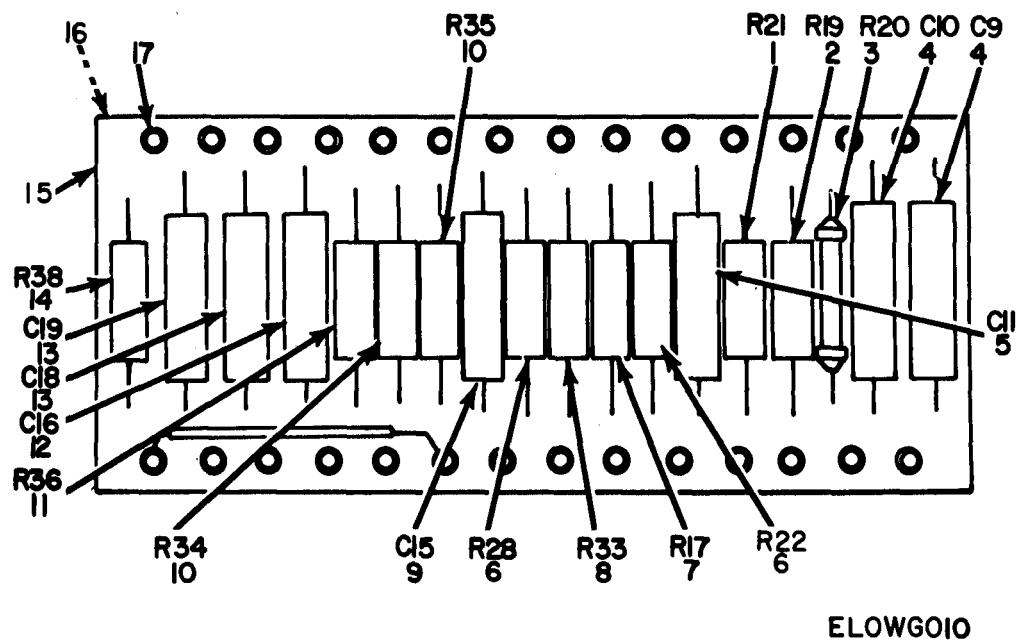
Voltmeter, Electronic ME-247/U or ME-247A/U, Terminal Board, Rear Assembly.
